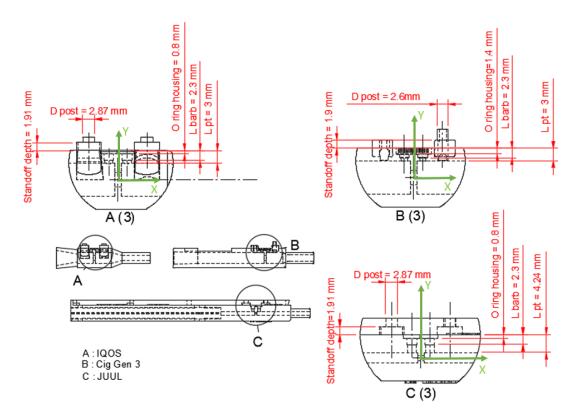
Electronic Boards Seating (Side View) for IQOS, Gen 3 and JUUL
